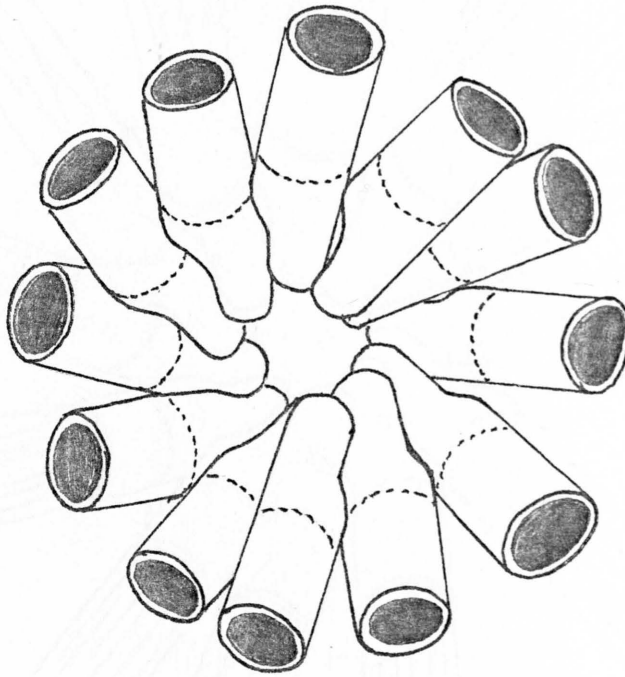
Welded pipe reducers. The reducers were welded together in this configuration.
